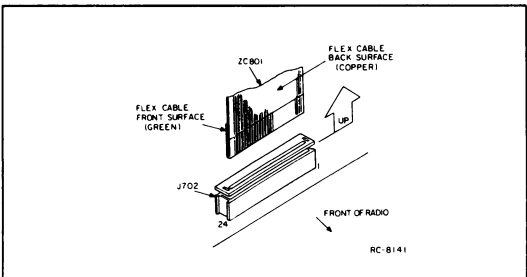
Connecting Flex Cable to J702 on System Control/Synthesizer Board A801
